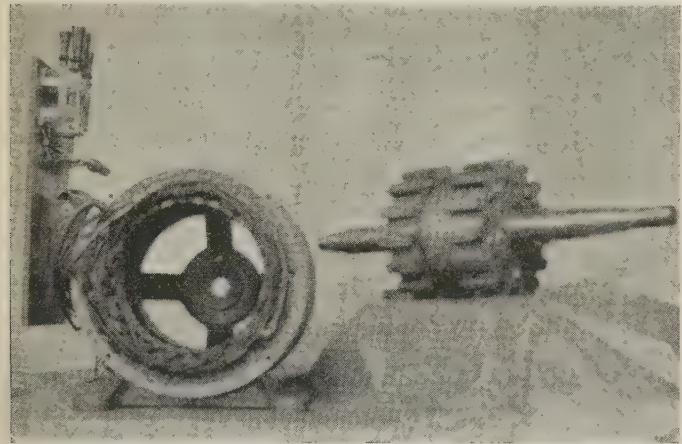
A multiple-circuit 900-cycle 3,600-rpm, double-core single-field arc welding generator
